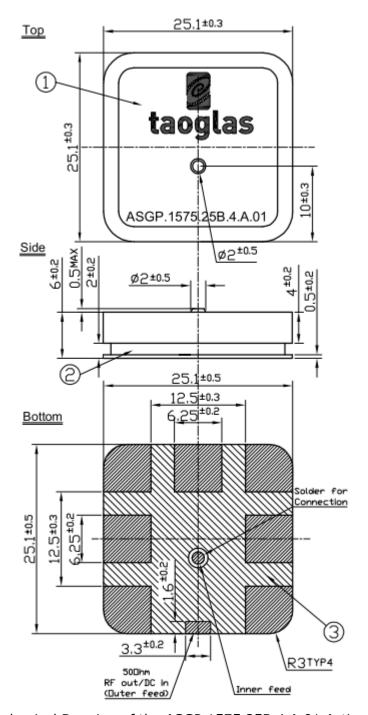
Mechanical Drawing of the ASGP.1575.25B.4.A.01 Active GPS Antenna
